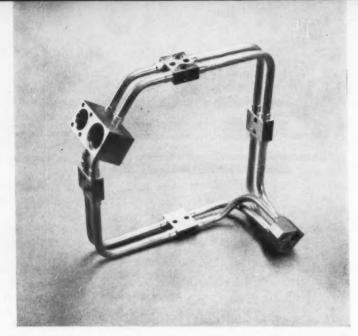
Sixteen separate components are furnaced-brazed with copper to form this assembly. Interference fits are used to obtain maximum strength.
